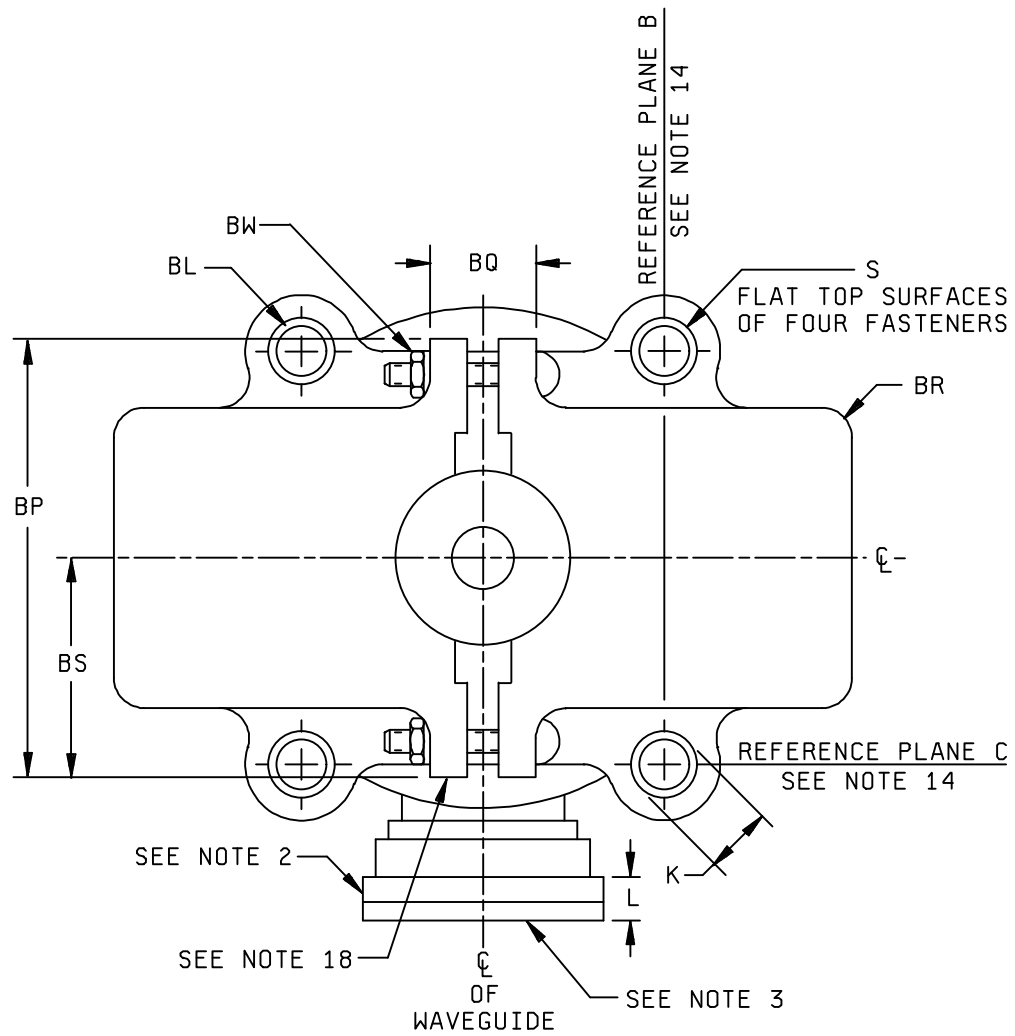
Outline drawing of electron tube type DOD-042 (top view).
